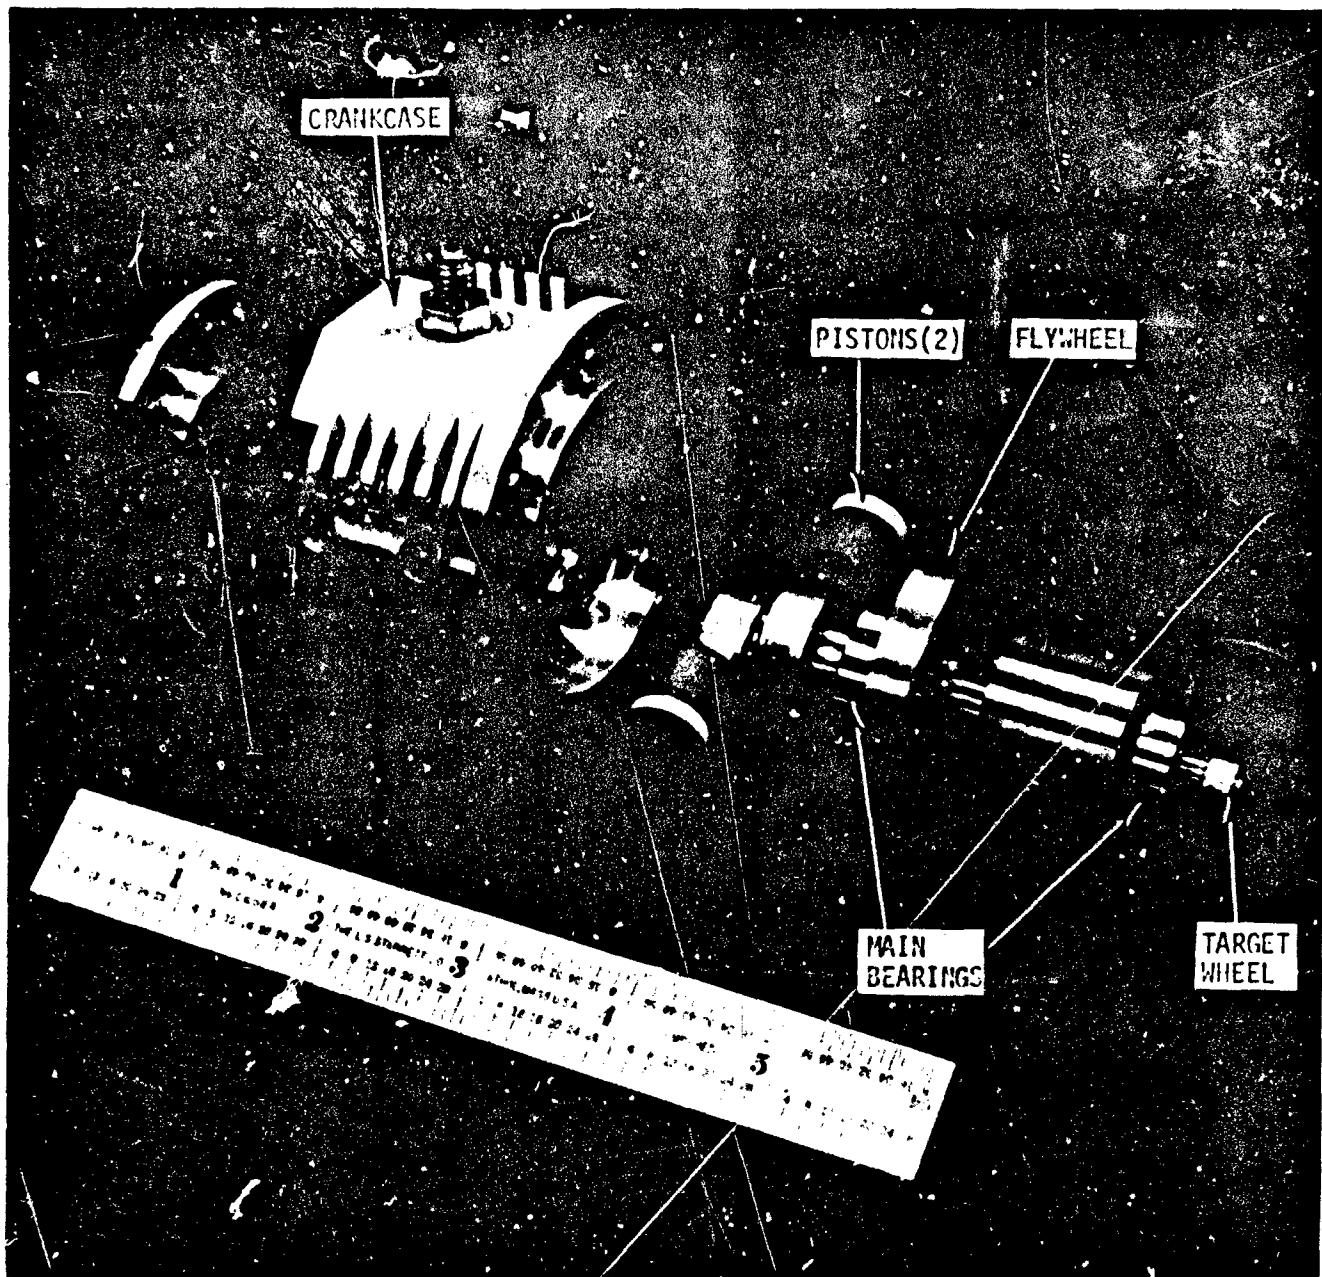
COMPRESSOR HOUSING-PISTONS AND CRANKSHAFT
